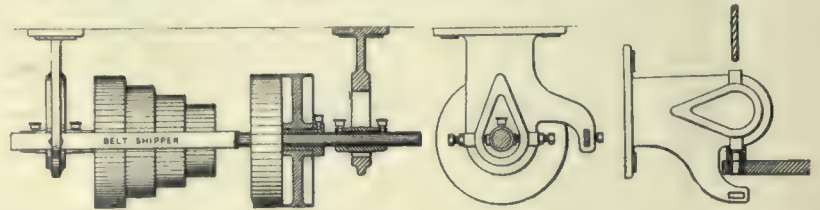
Designing Cheap Hangers.—Fig. 2.
